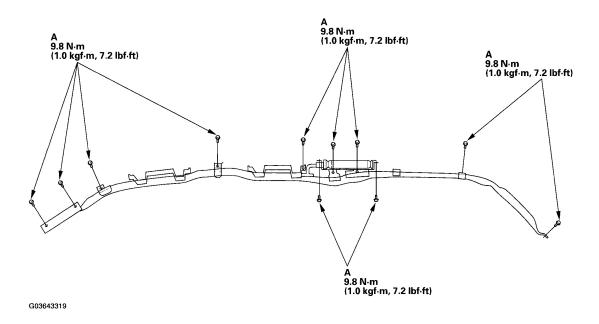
Tightening Side Curtain Airbag Mounting Bolts Courtesy of AMERICAN HONDA MOTOR CO., INC.
